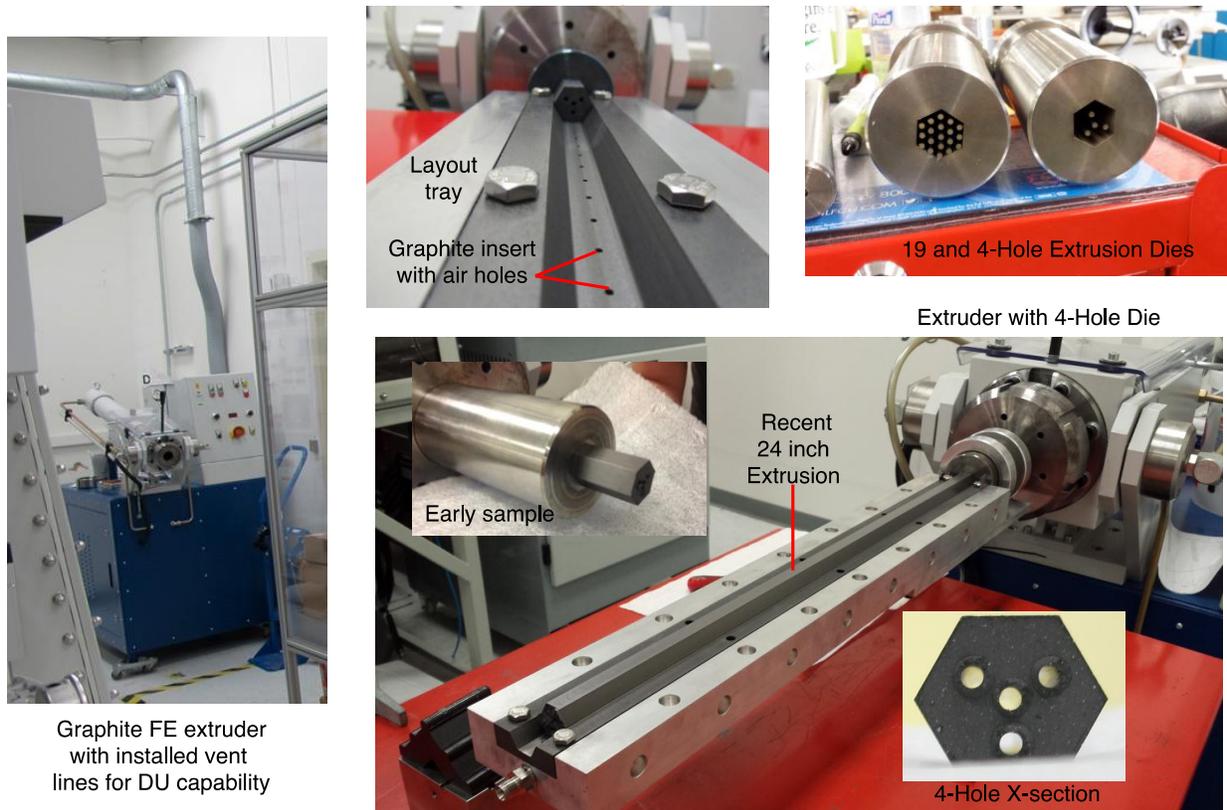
Equipment Assembled at ORNL for Extrusion of Composite Fuel Elements
